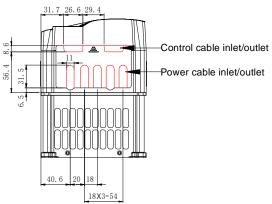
Wiring hole sizes 1.5–2.2kW
